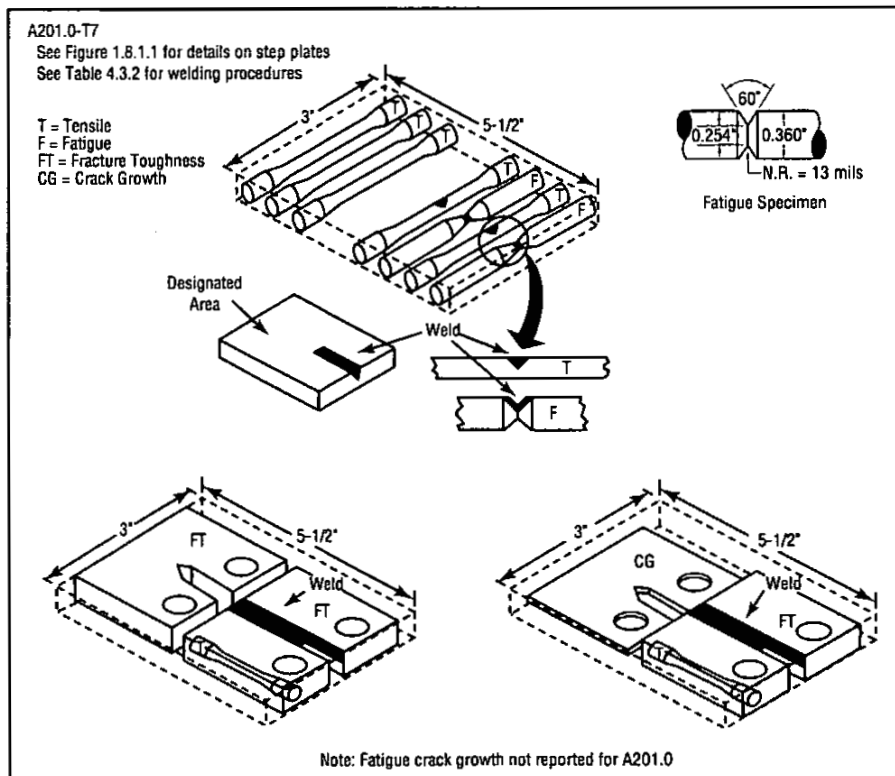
Location of specimens in the designated areas of welded step plates (Ref. 6, Fig. 110)
